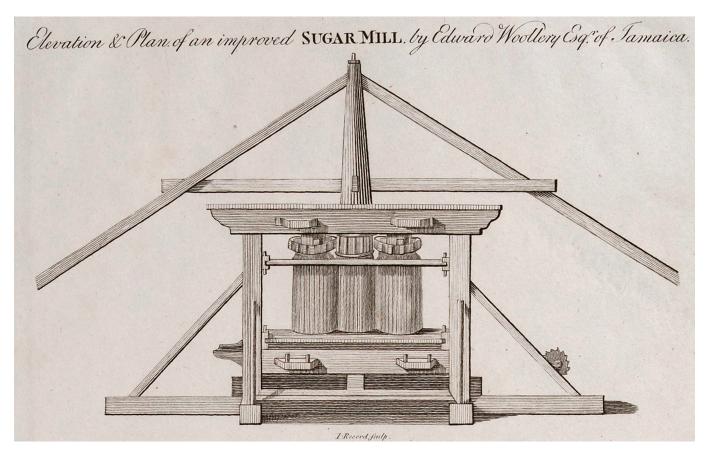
Elevation and Plan of an Improved Sugar Mill with vertical rollers (Edwards 1801).
